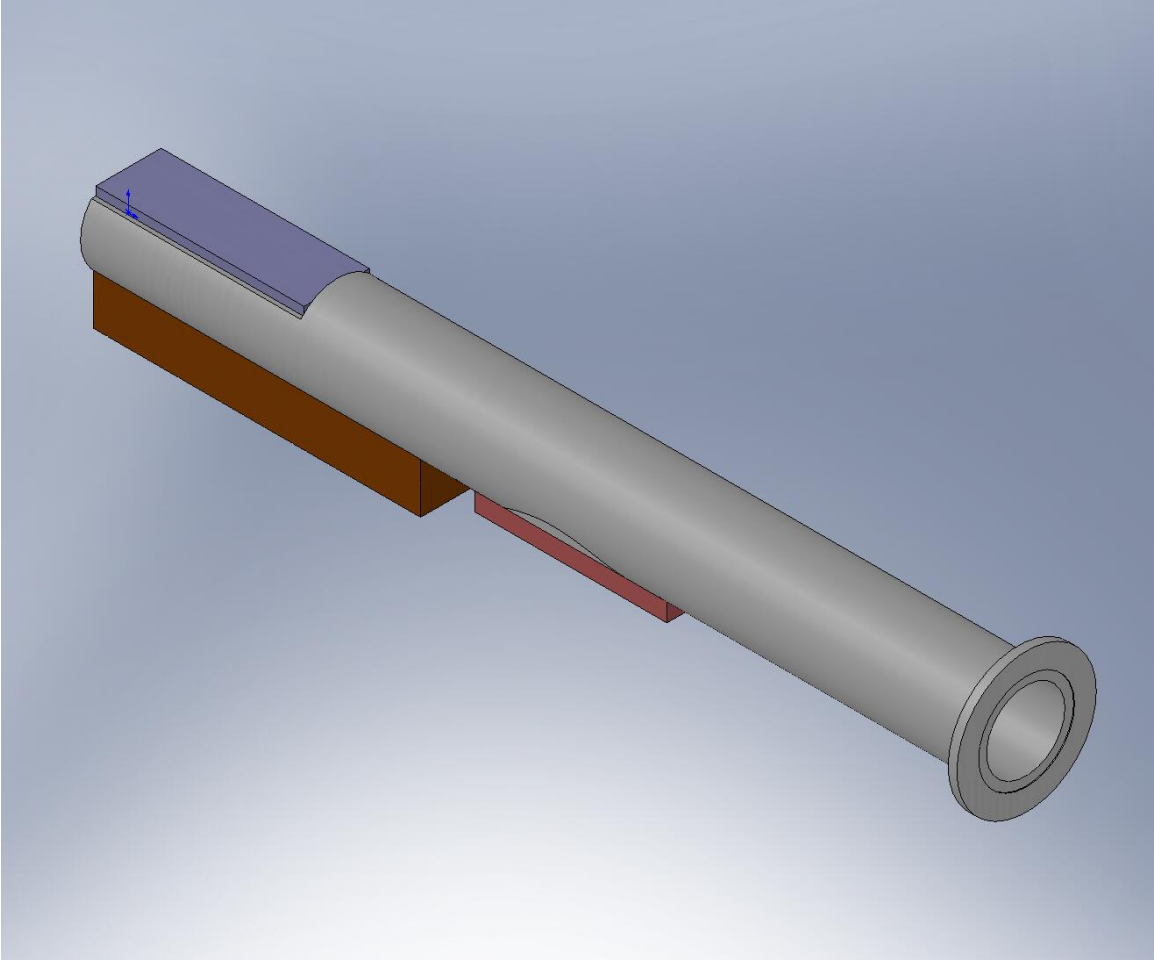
FEA model of proposed Crossbeam tube. Refer to Figure 25 and Figure 26 for details on “weld on” plates and extrusions.
